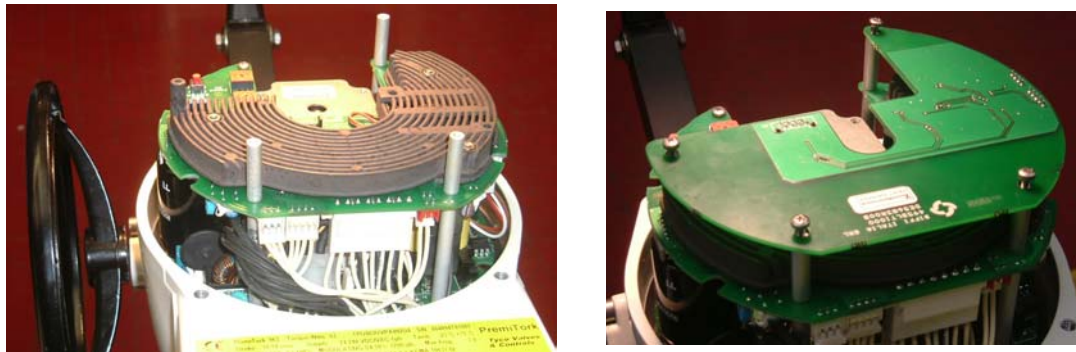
/8a: Installing the Electronic Card on the F02 Actuator
